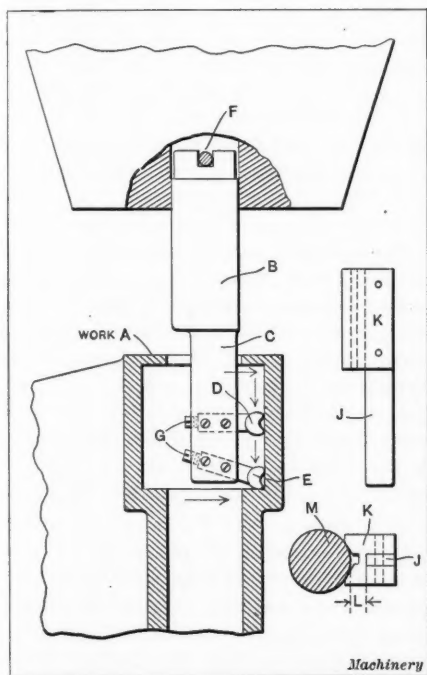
Bar for Undercutting, Facing and Boring in the Vertical Turret Lathe and Gage used in setting Tools
